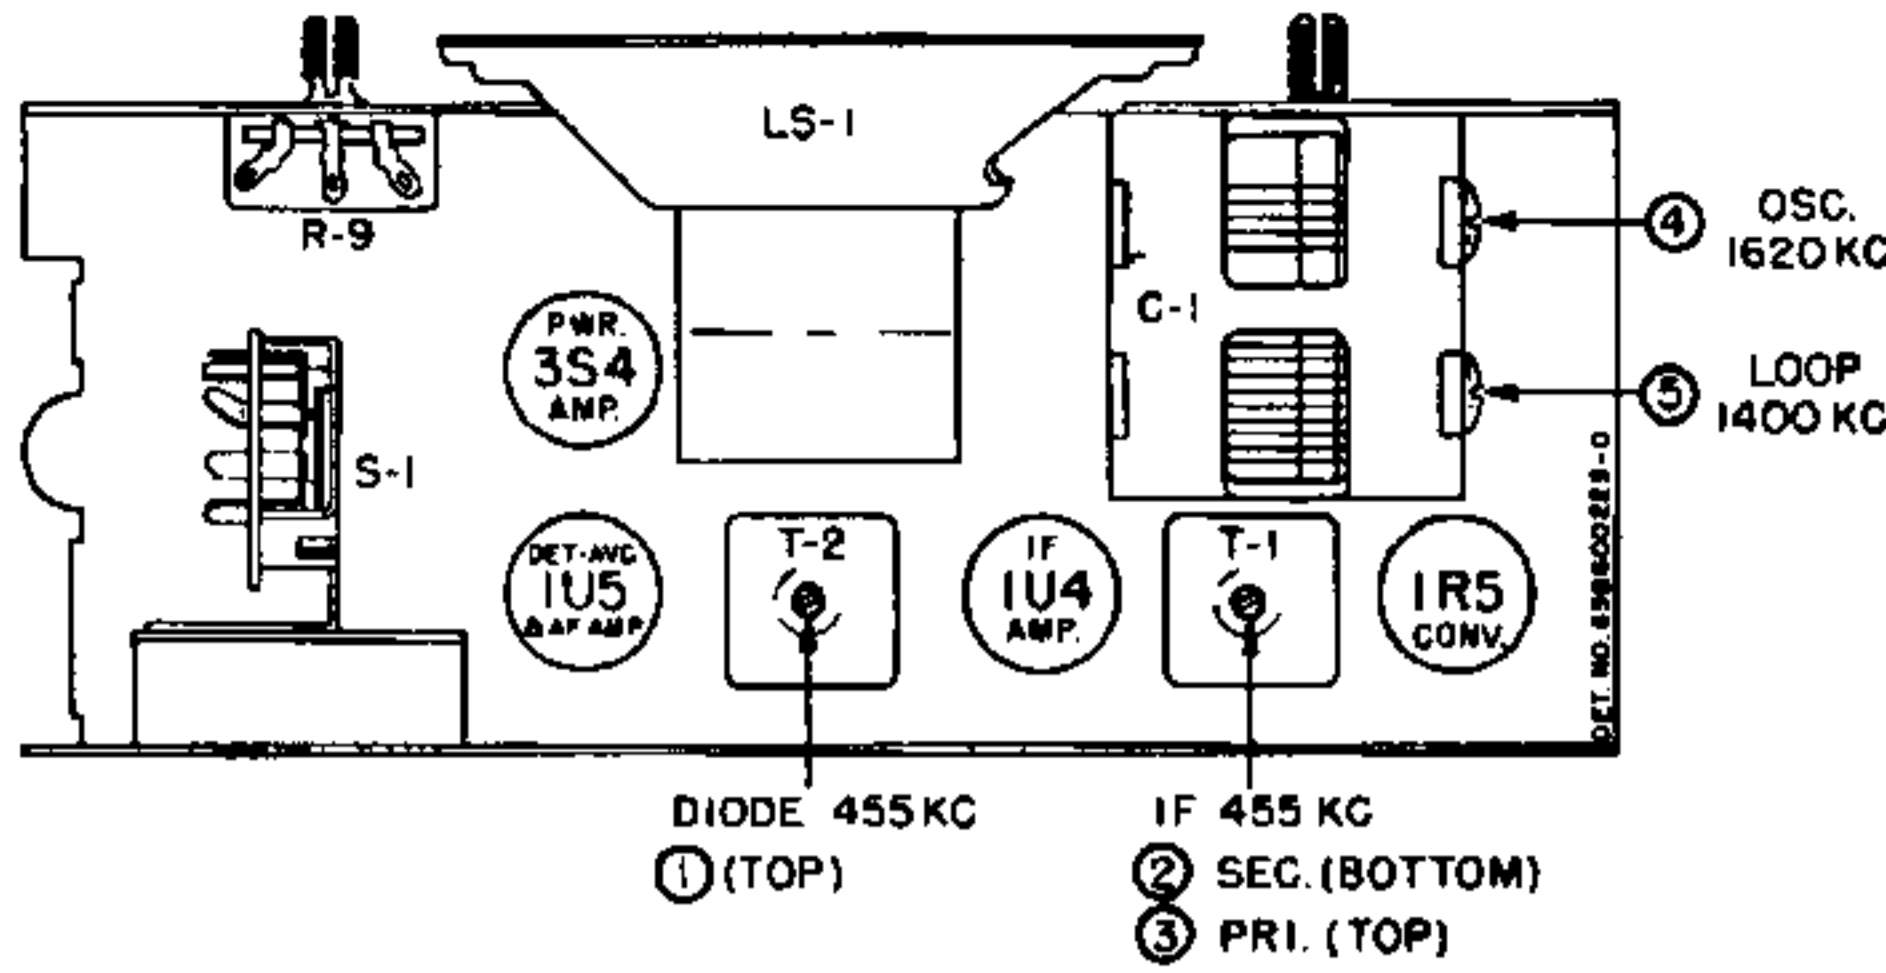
TUBE & TRIMMER LOCATIONS
